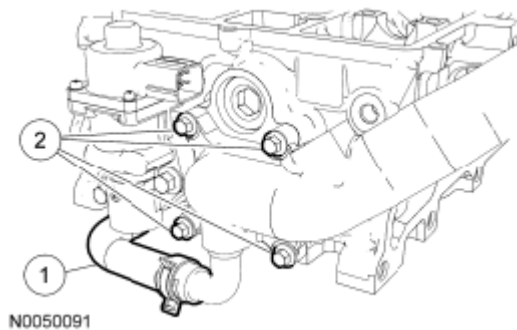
Locating Rear Coolant Outlet Pipe Bolts
